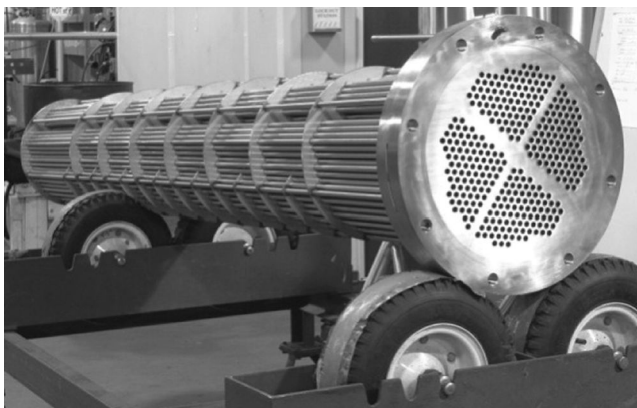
Completed tube bundle assembly placed on rolls/trolley. (Courtesy of Allegheny Bradford Corporation, Bradford, PA.)
